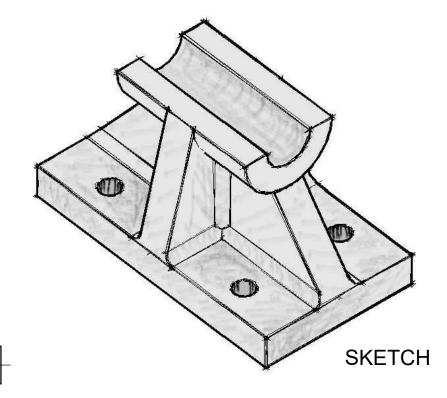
shows a pictorial drawing of a cast iron support station. The right End elevation, Plan, and an outline of the sectional Front elevation are given below.
